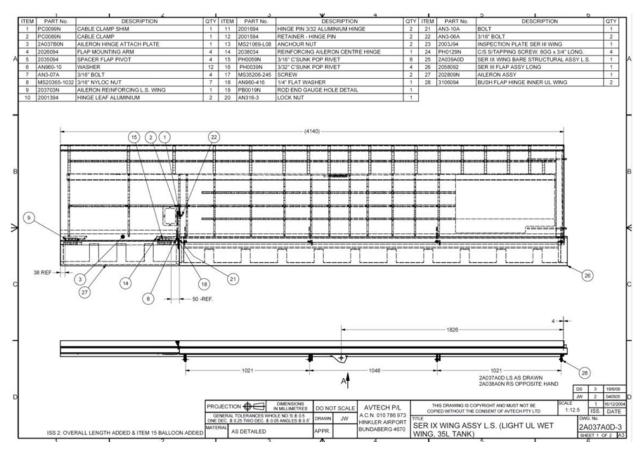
J170-UL Wing Assy Sheet 1 Ser IX (J170)
